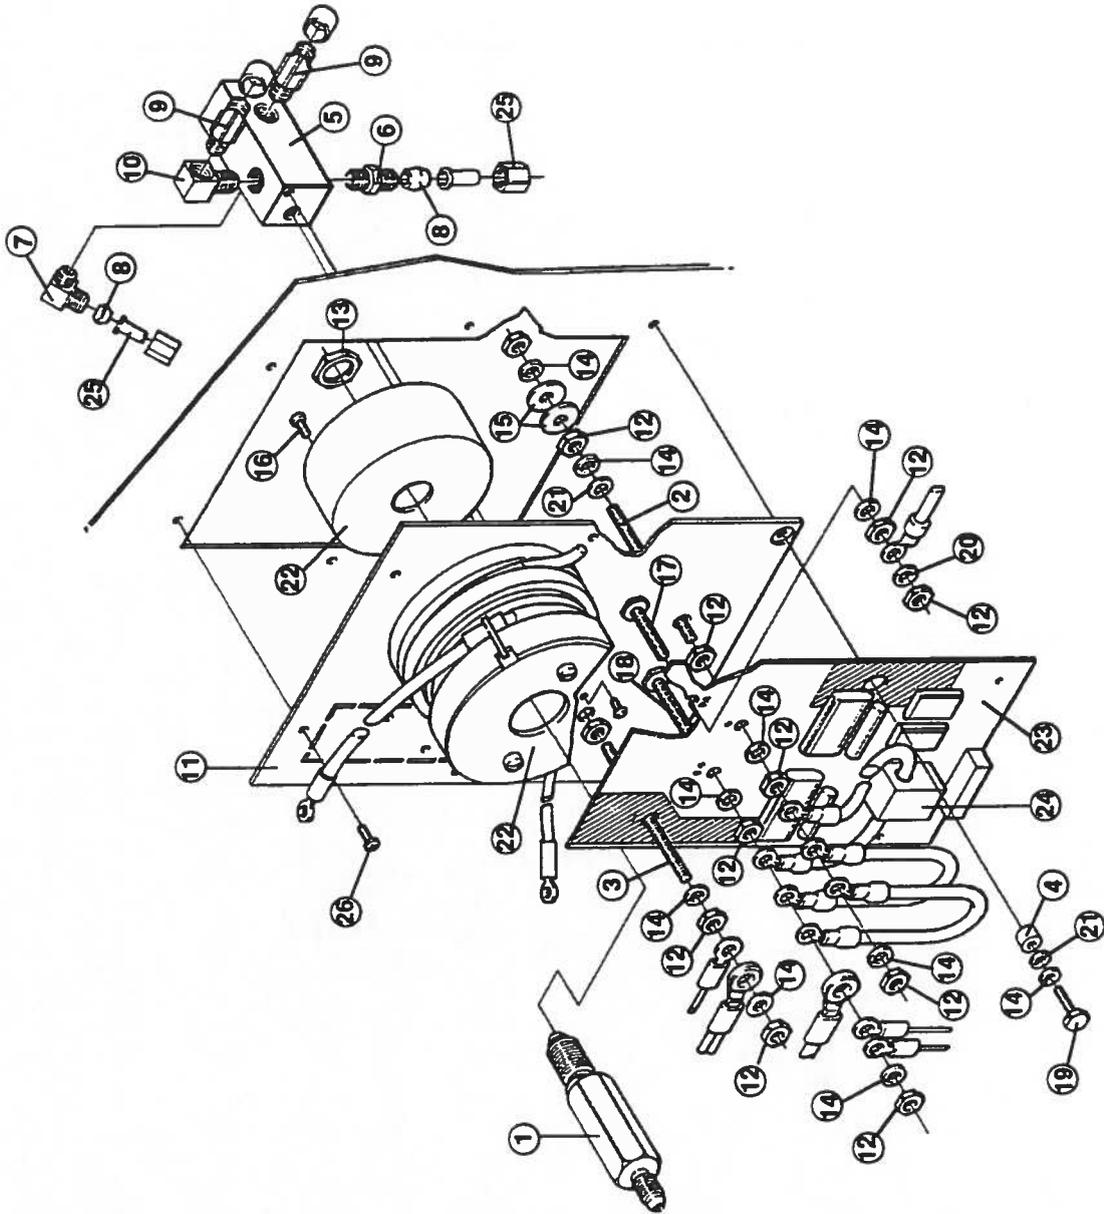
HT2000 Power Supply - High Frequency & I/O PCB Assembly
